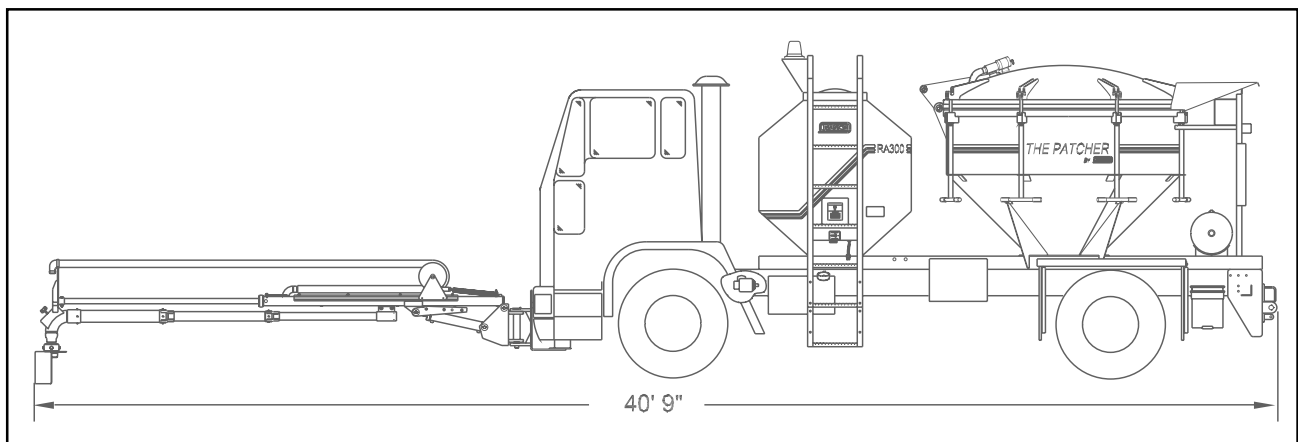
OUTLINE DIMENSIONAL DRAWING WITH BOOM EXTENDED
